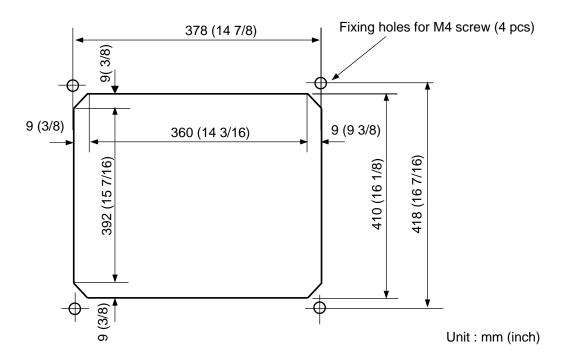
Dimensions of opening and fixing holes for GTD-150
